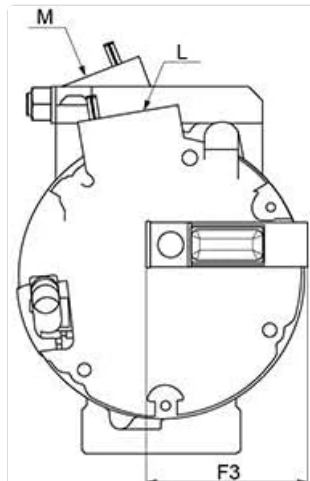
Side view technical drawing, detailing the height and specific port locations with their respective dimensions.
